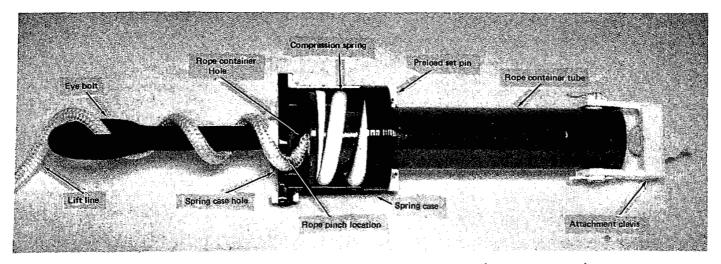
Attachment Arm/Tension Limiter Assembly. (Sectioned view)
